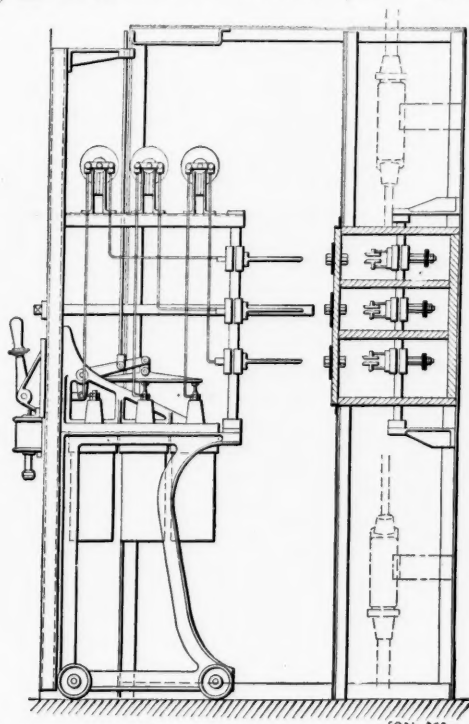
SIDE ELEVATION OF SWITCH UNIT
